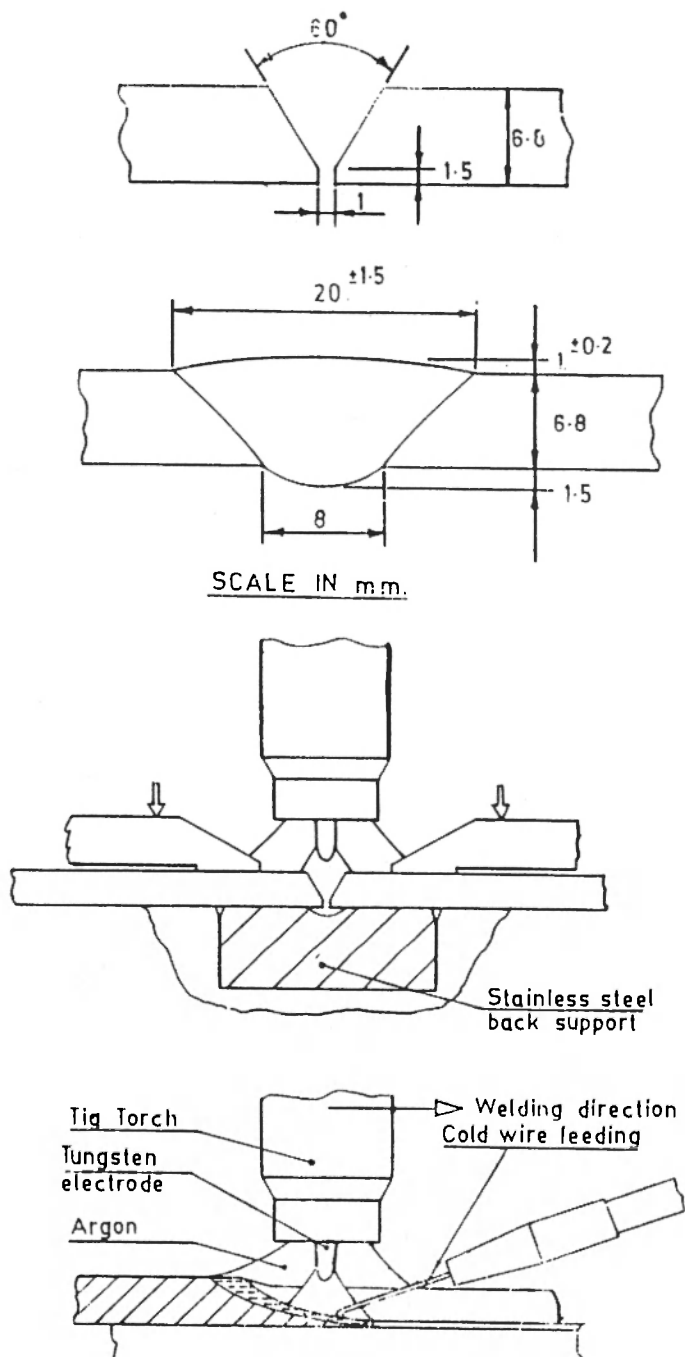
Joint preparation and scheme of welding procedure
